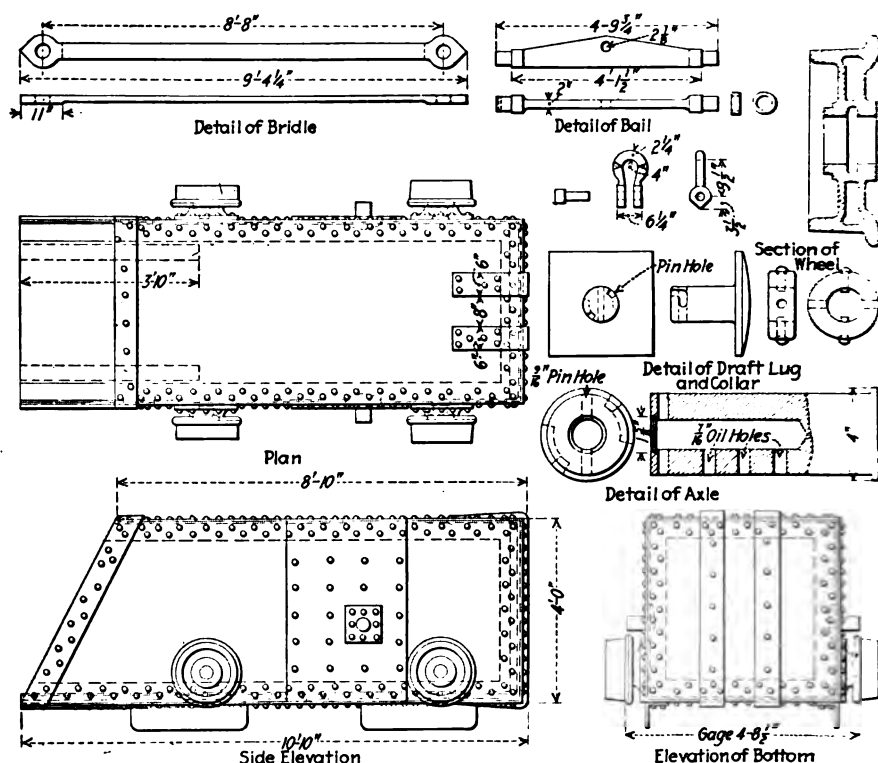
DETAILS OF THE SKIP USED AT THE CHAMPION MINE.
